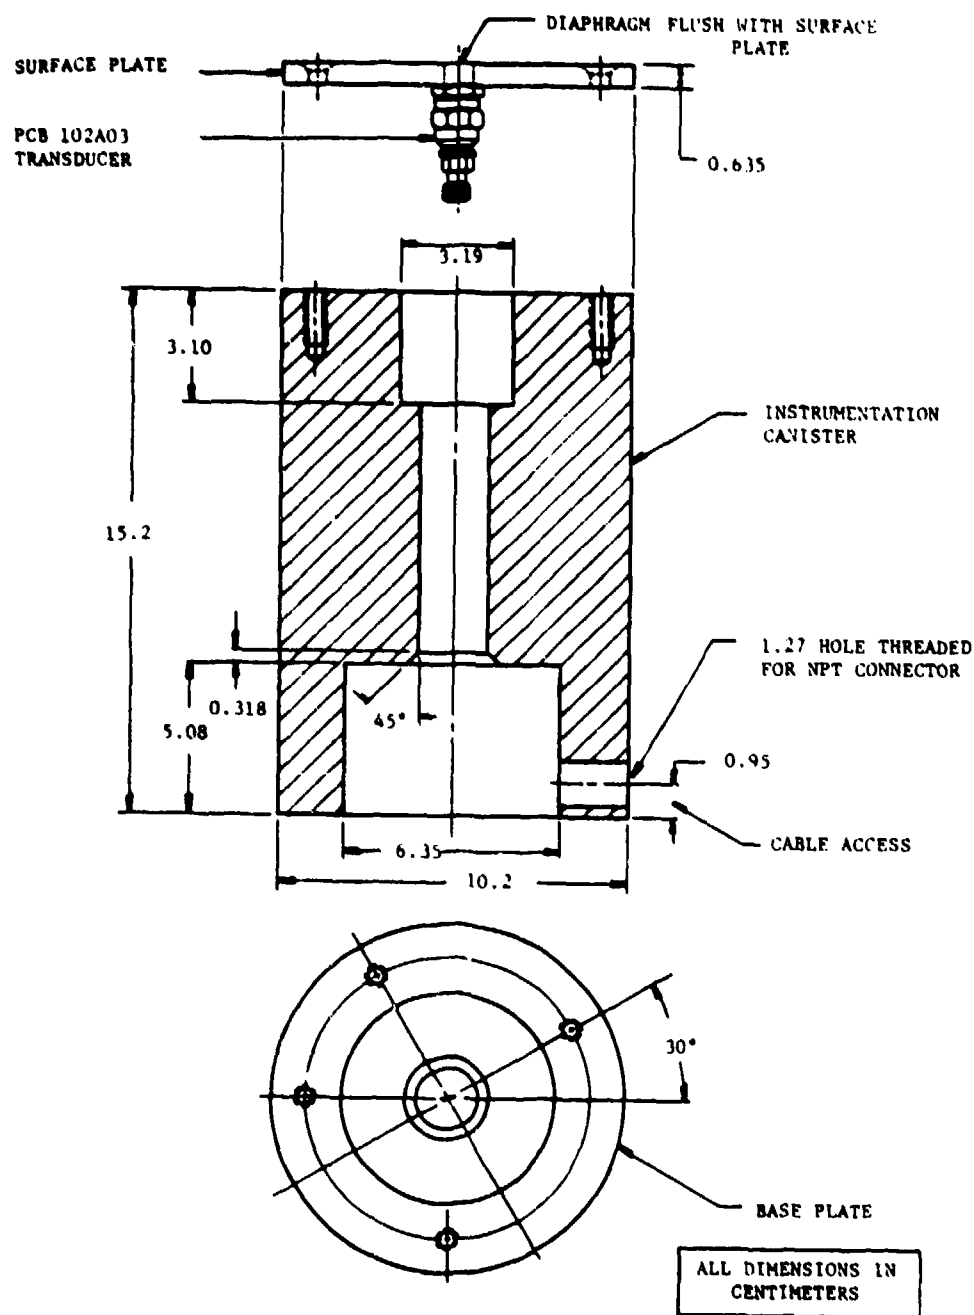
EXPLODED DIAGRAM OF THE PRESSURE MEASUREMENT ASSEMBLY
